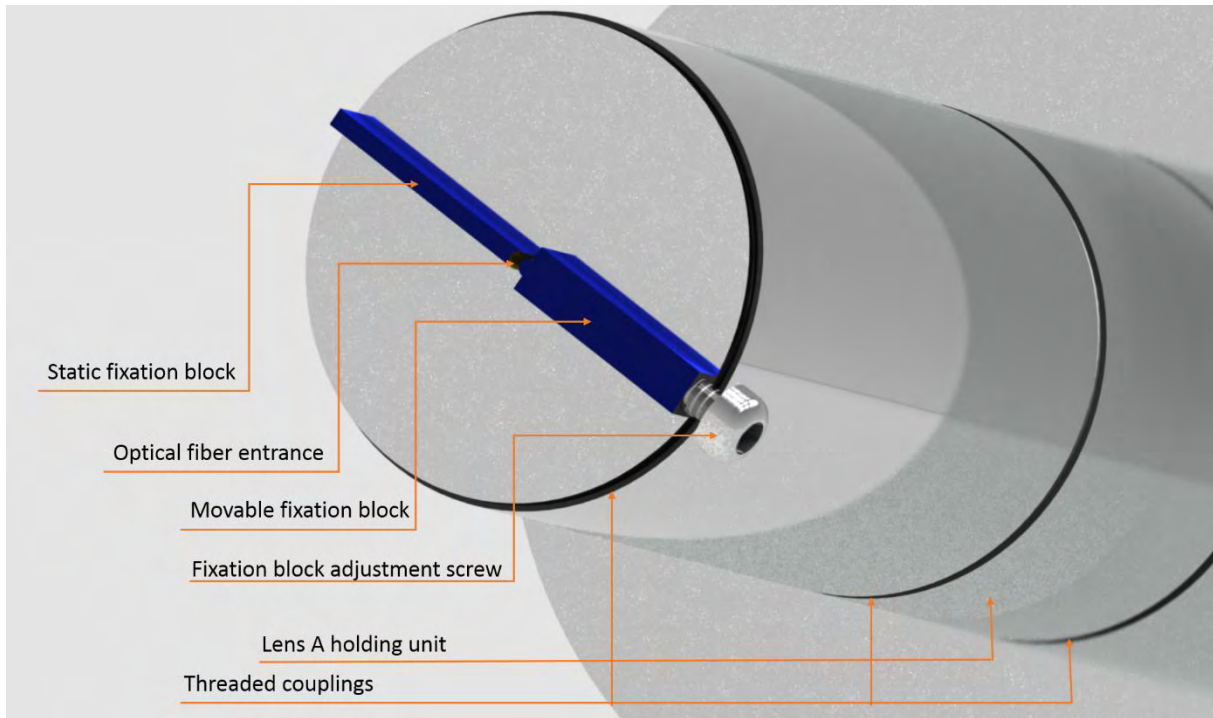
3D-Model of the Hand-Held Piece (rear view).
